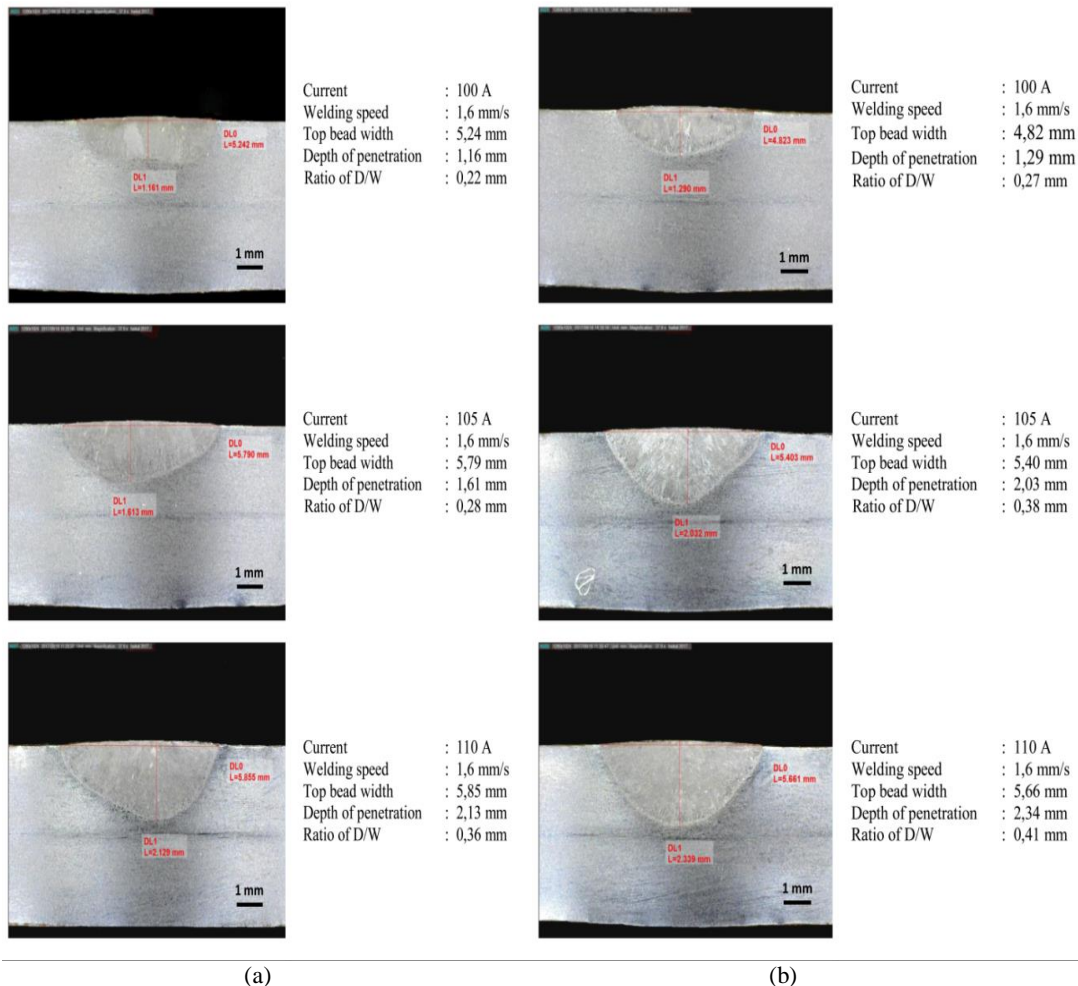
The geometric shape of (a) Conventional TIG welding and (b) EMF-TIG welding.
